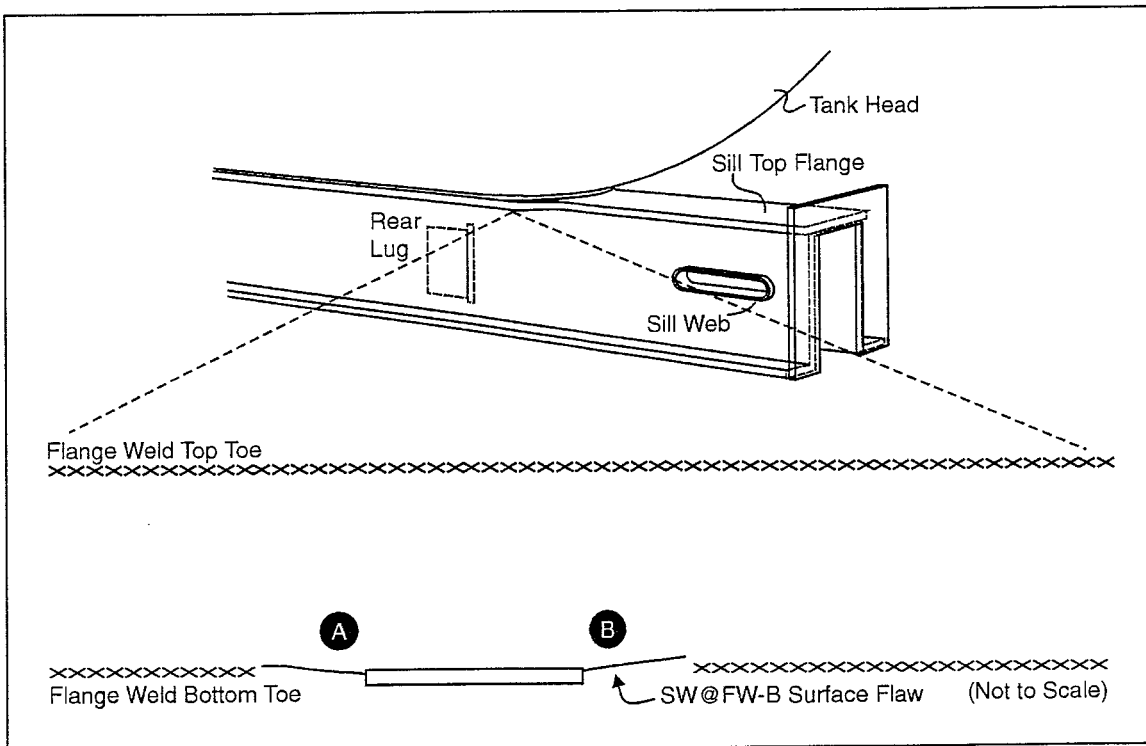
B-end Left Flange Weld Cracks and Preflaw
